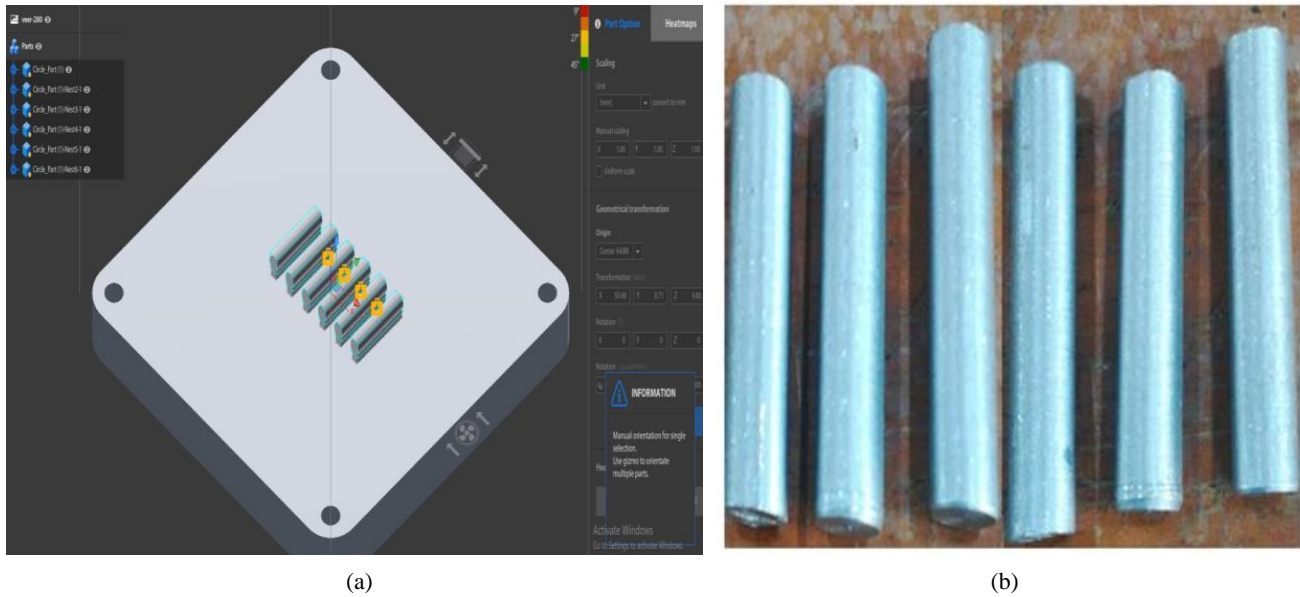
a) SLM build platform layout of specimen and b) After SLM-AM manufactured specimens.
